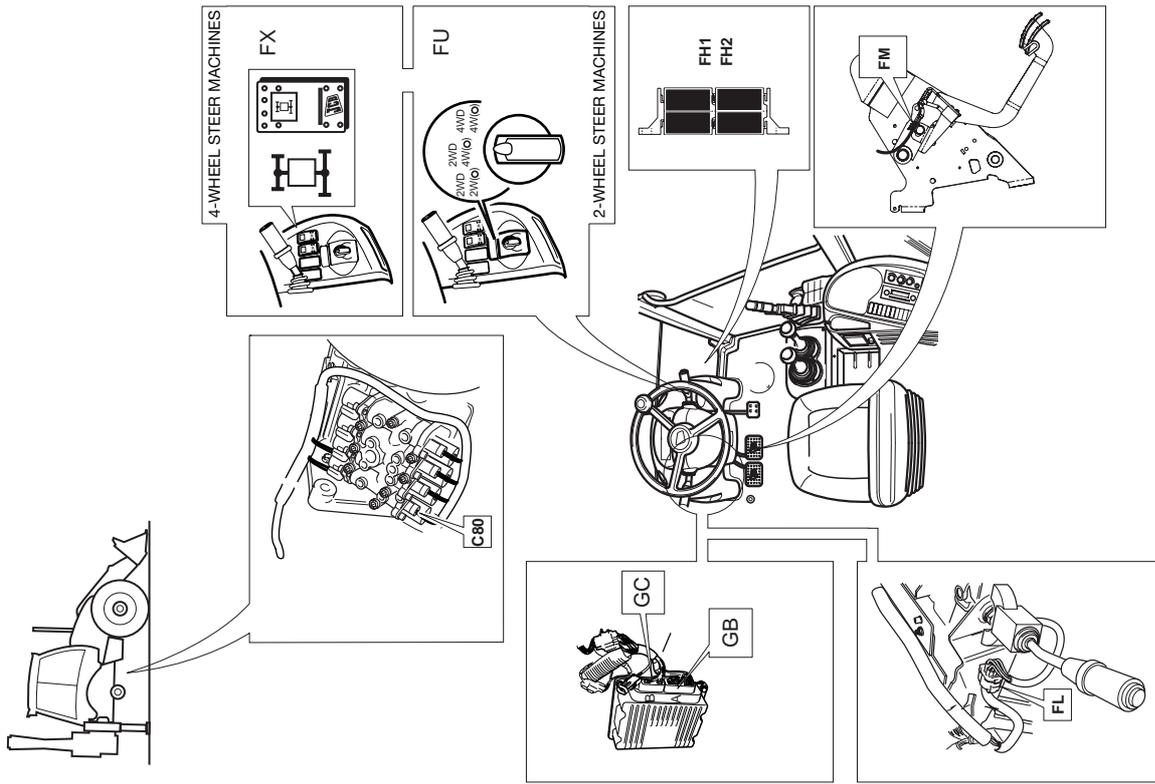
2 and 4 Wheel Steer Machines, Shiftmaster
